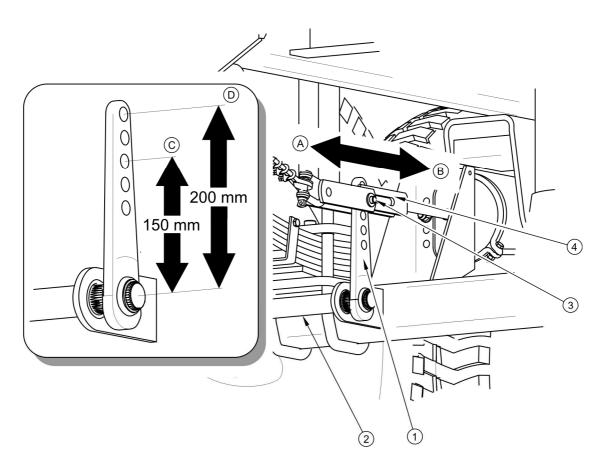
ADJUSTMENT OF AXLE MECHANICAL BRAKES
